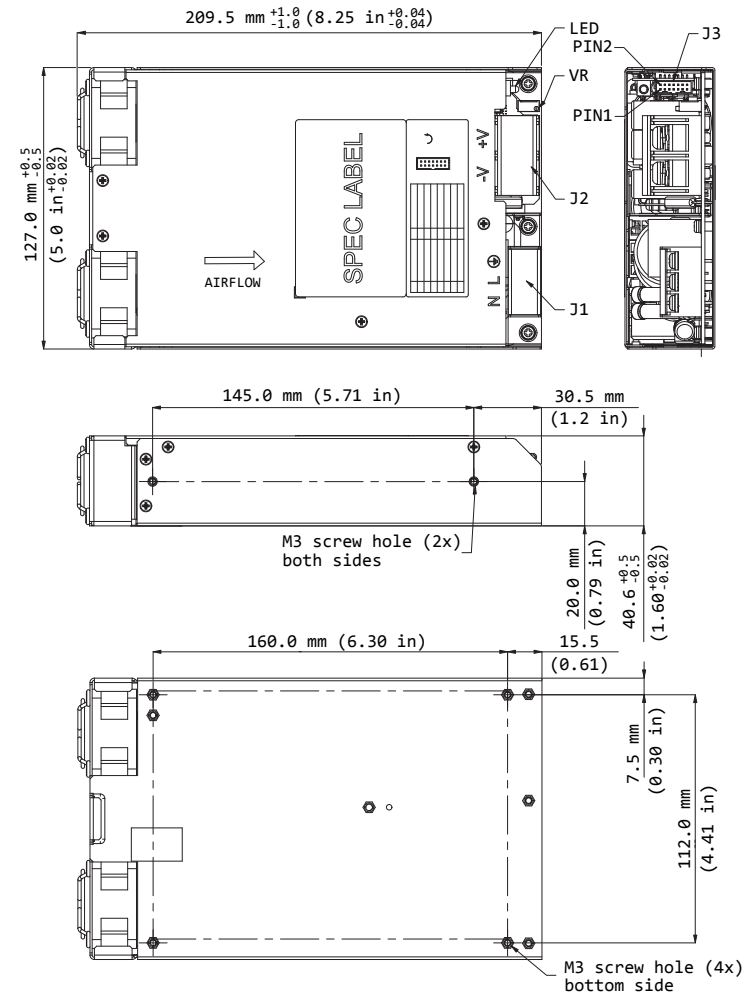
Dimensional drawing IMA-S1000-xx-xxxxx
